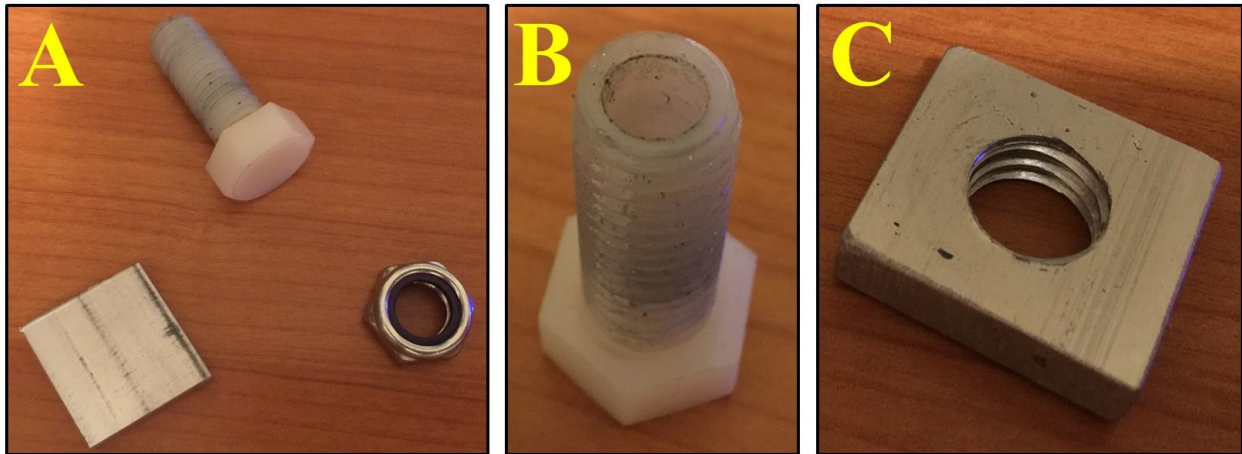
(A) Each pencil-top fidget was made from three fundamental components, a 1/2"-13 nylon bolt, a metal lock nut, and a blank aluminum square. (B) The center of the nylon bolt was drilled with a 15/64" blind hole to facilitate mounting the finished assembly in a pencil. (C) The aluminum blank was drilled and tapped with 1/2"-13 threads to fit over the nylon bolt and freely spin.
